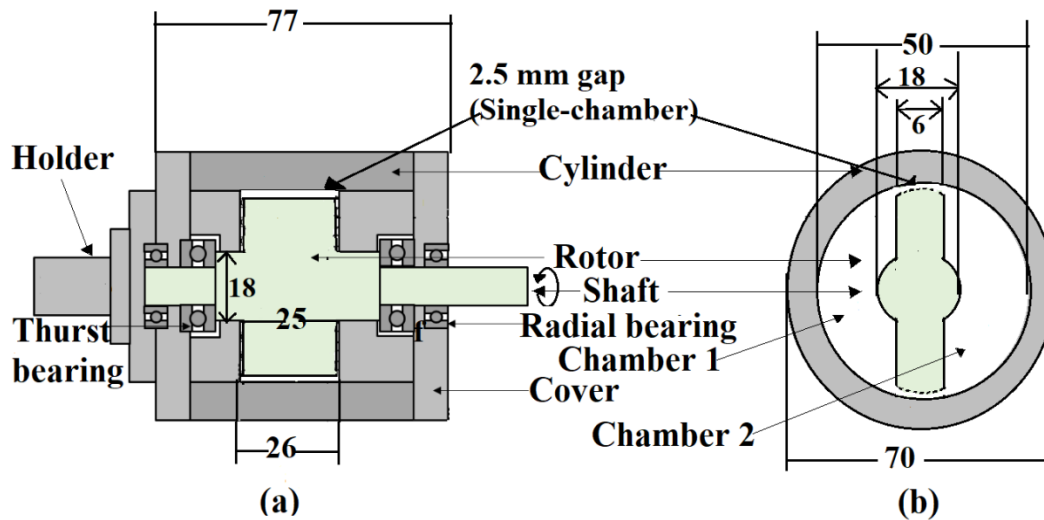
Schematic diagram of the damper with gap between rotor and cylinder. (a) Cross-sectional side view and (b) cross-sectional top view.
